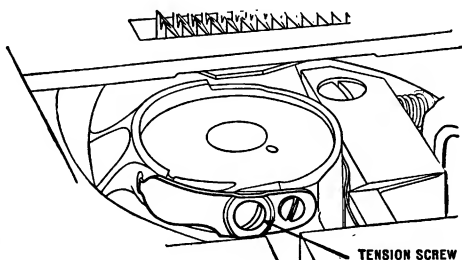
Position of the tension-regulating screw on the stationary bobbin case.
